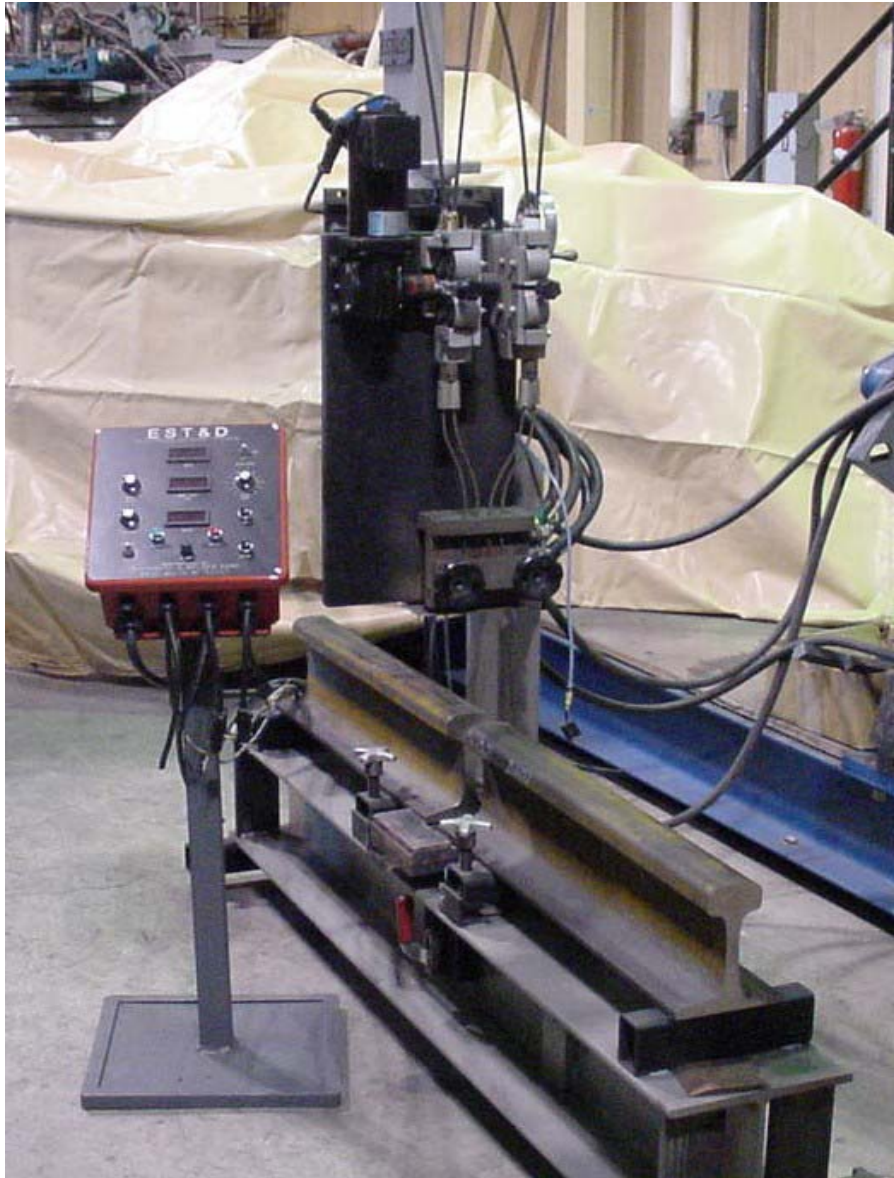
Rail welding fixture with rail and starting block in place. Weld wire spools are supported by the mast above the wire drive board.
